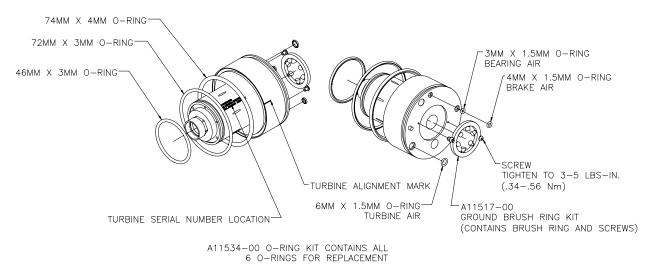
Turbine Ground Brush Ring Removal / Replacment and Turbine O-Ring Replacement
